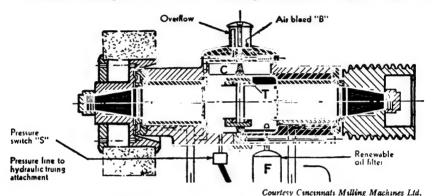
Grinding Wheel Spindle showing Filmatic Bearing
